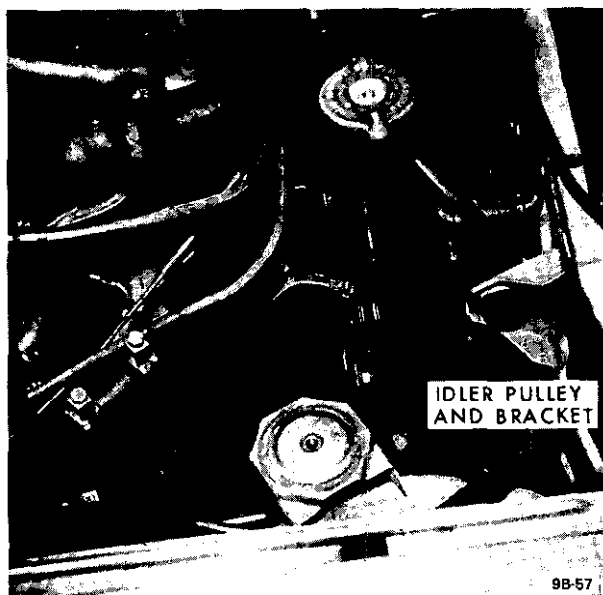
B-80 Location of Idler Pulley and Bracket Assembly • GT
